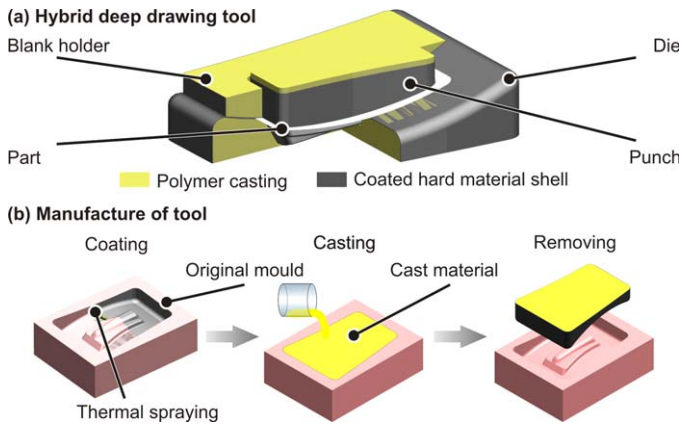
(a) Design and (b) manufacture of the hybrid deep drawing tool.
